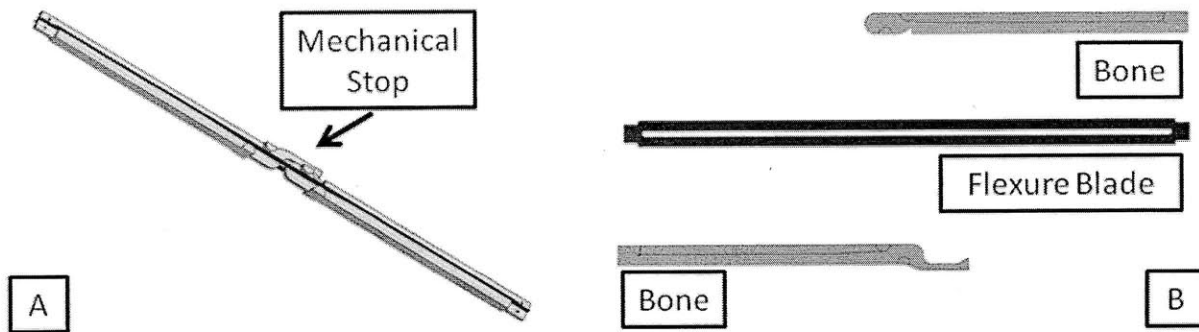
CAD models of the Squishbot1 leg assembly. (A) Shows the assembled leg and (B) presents a top view of the three components of the leg.
